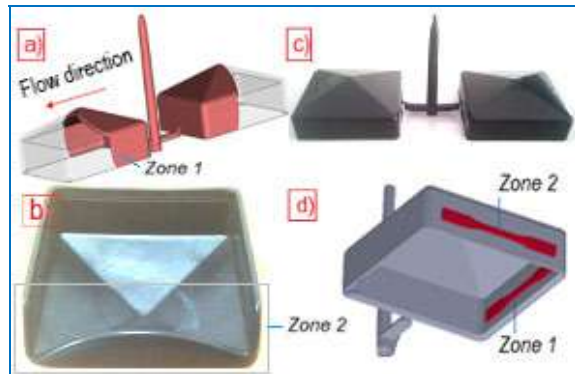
Flow direction, tool filling and sample cutting zones for tensile tests
